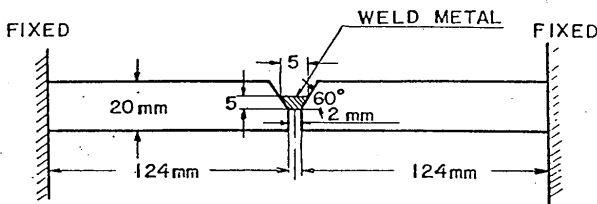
Rigidly restrained weld cracking test specimen.
